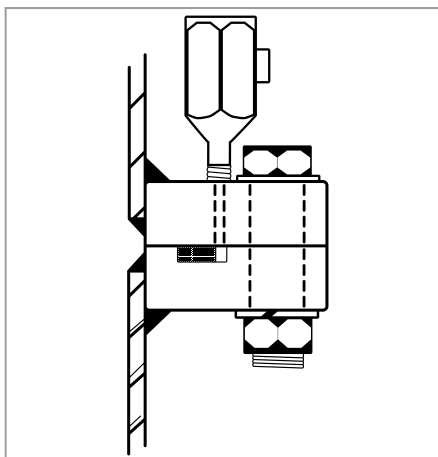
Sketch depicting the drill and inject nozzle-valve placed to fill the gasket groove of the flange
